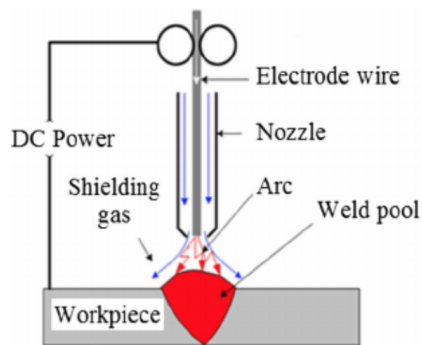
Illustration of gas metal arc welding. Source: [13]
